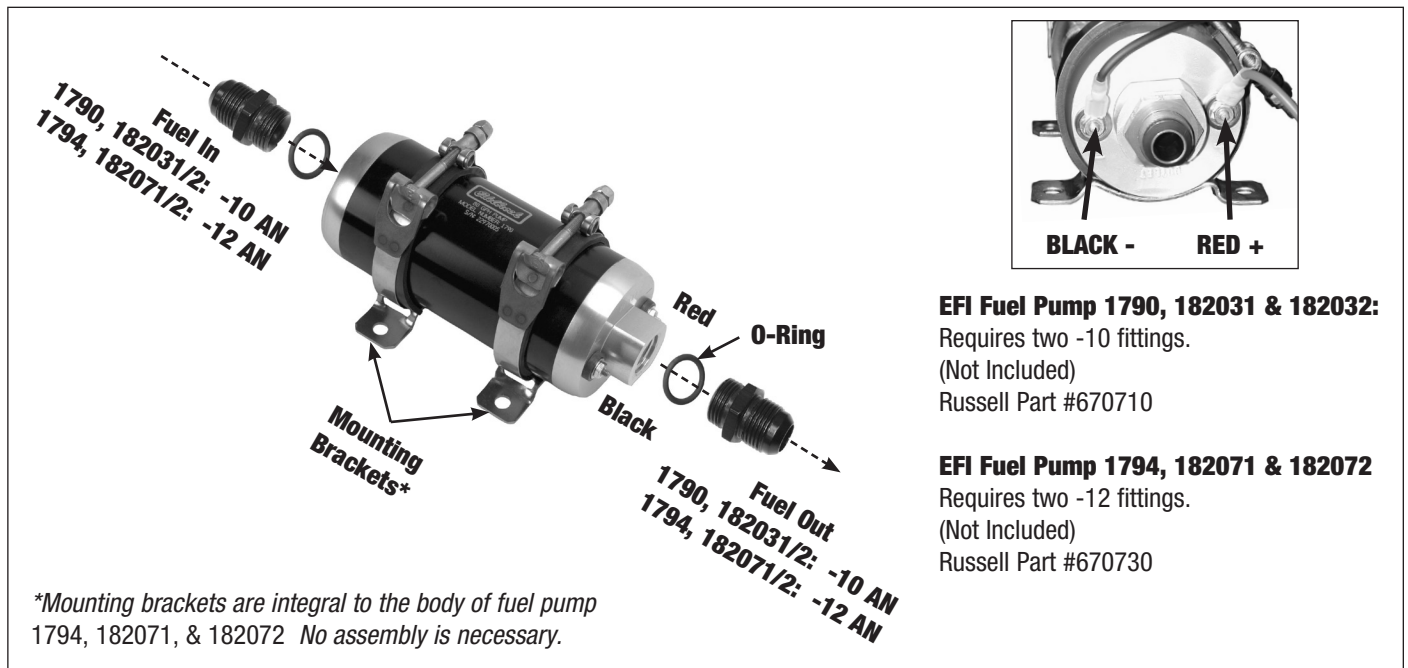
Fuel Pump Fitting Assembly (1790 Pictured)
